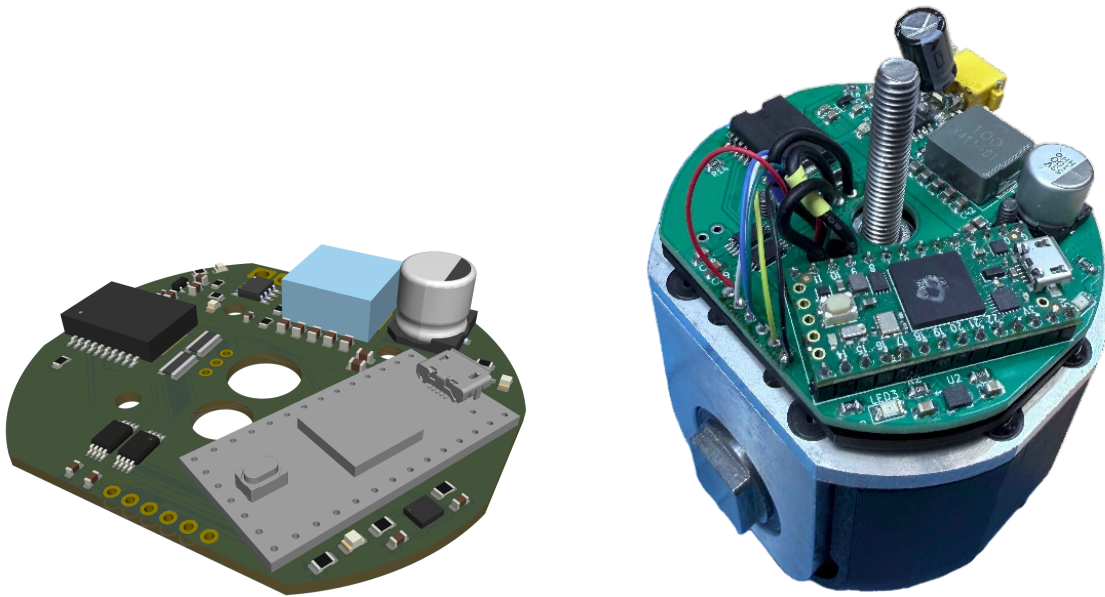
Full PCB assemblies. On the left is the visualization of the PCB design. On the right is the manufactured version of the PCB mounted on the elbow assembly.
